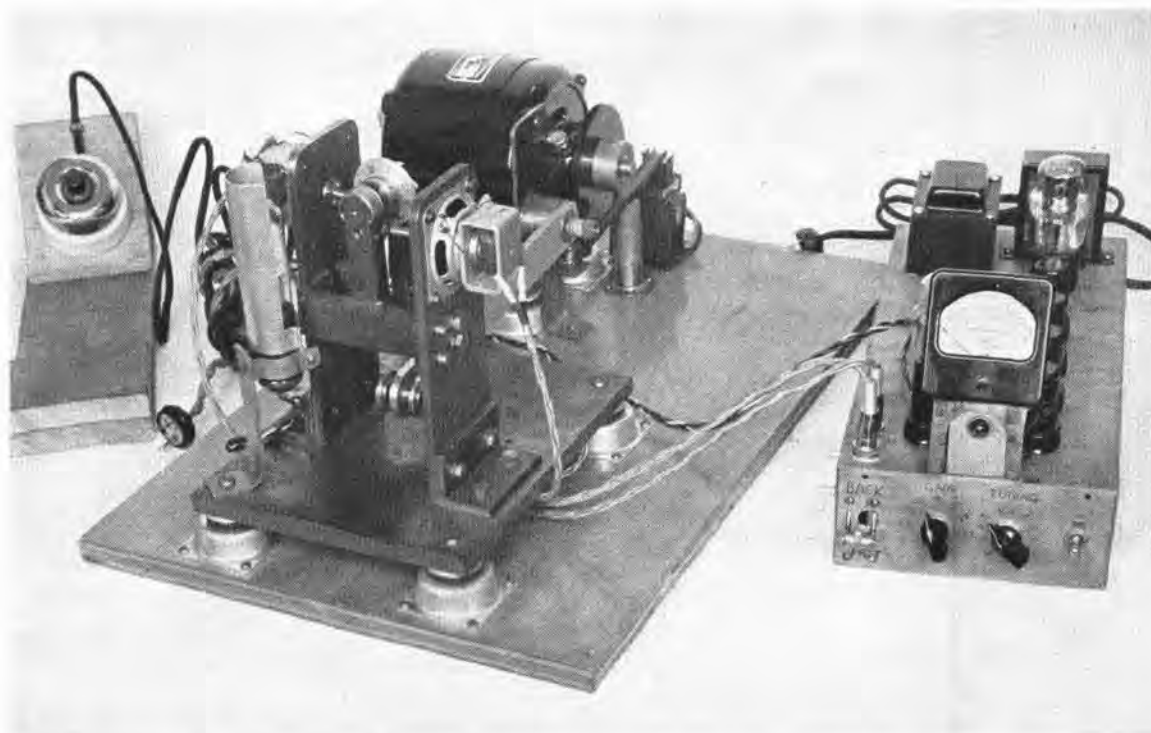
Dynamic balancing machine shown in Figure 52 and accessory equipment.
